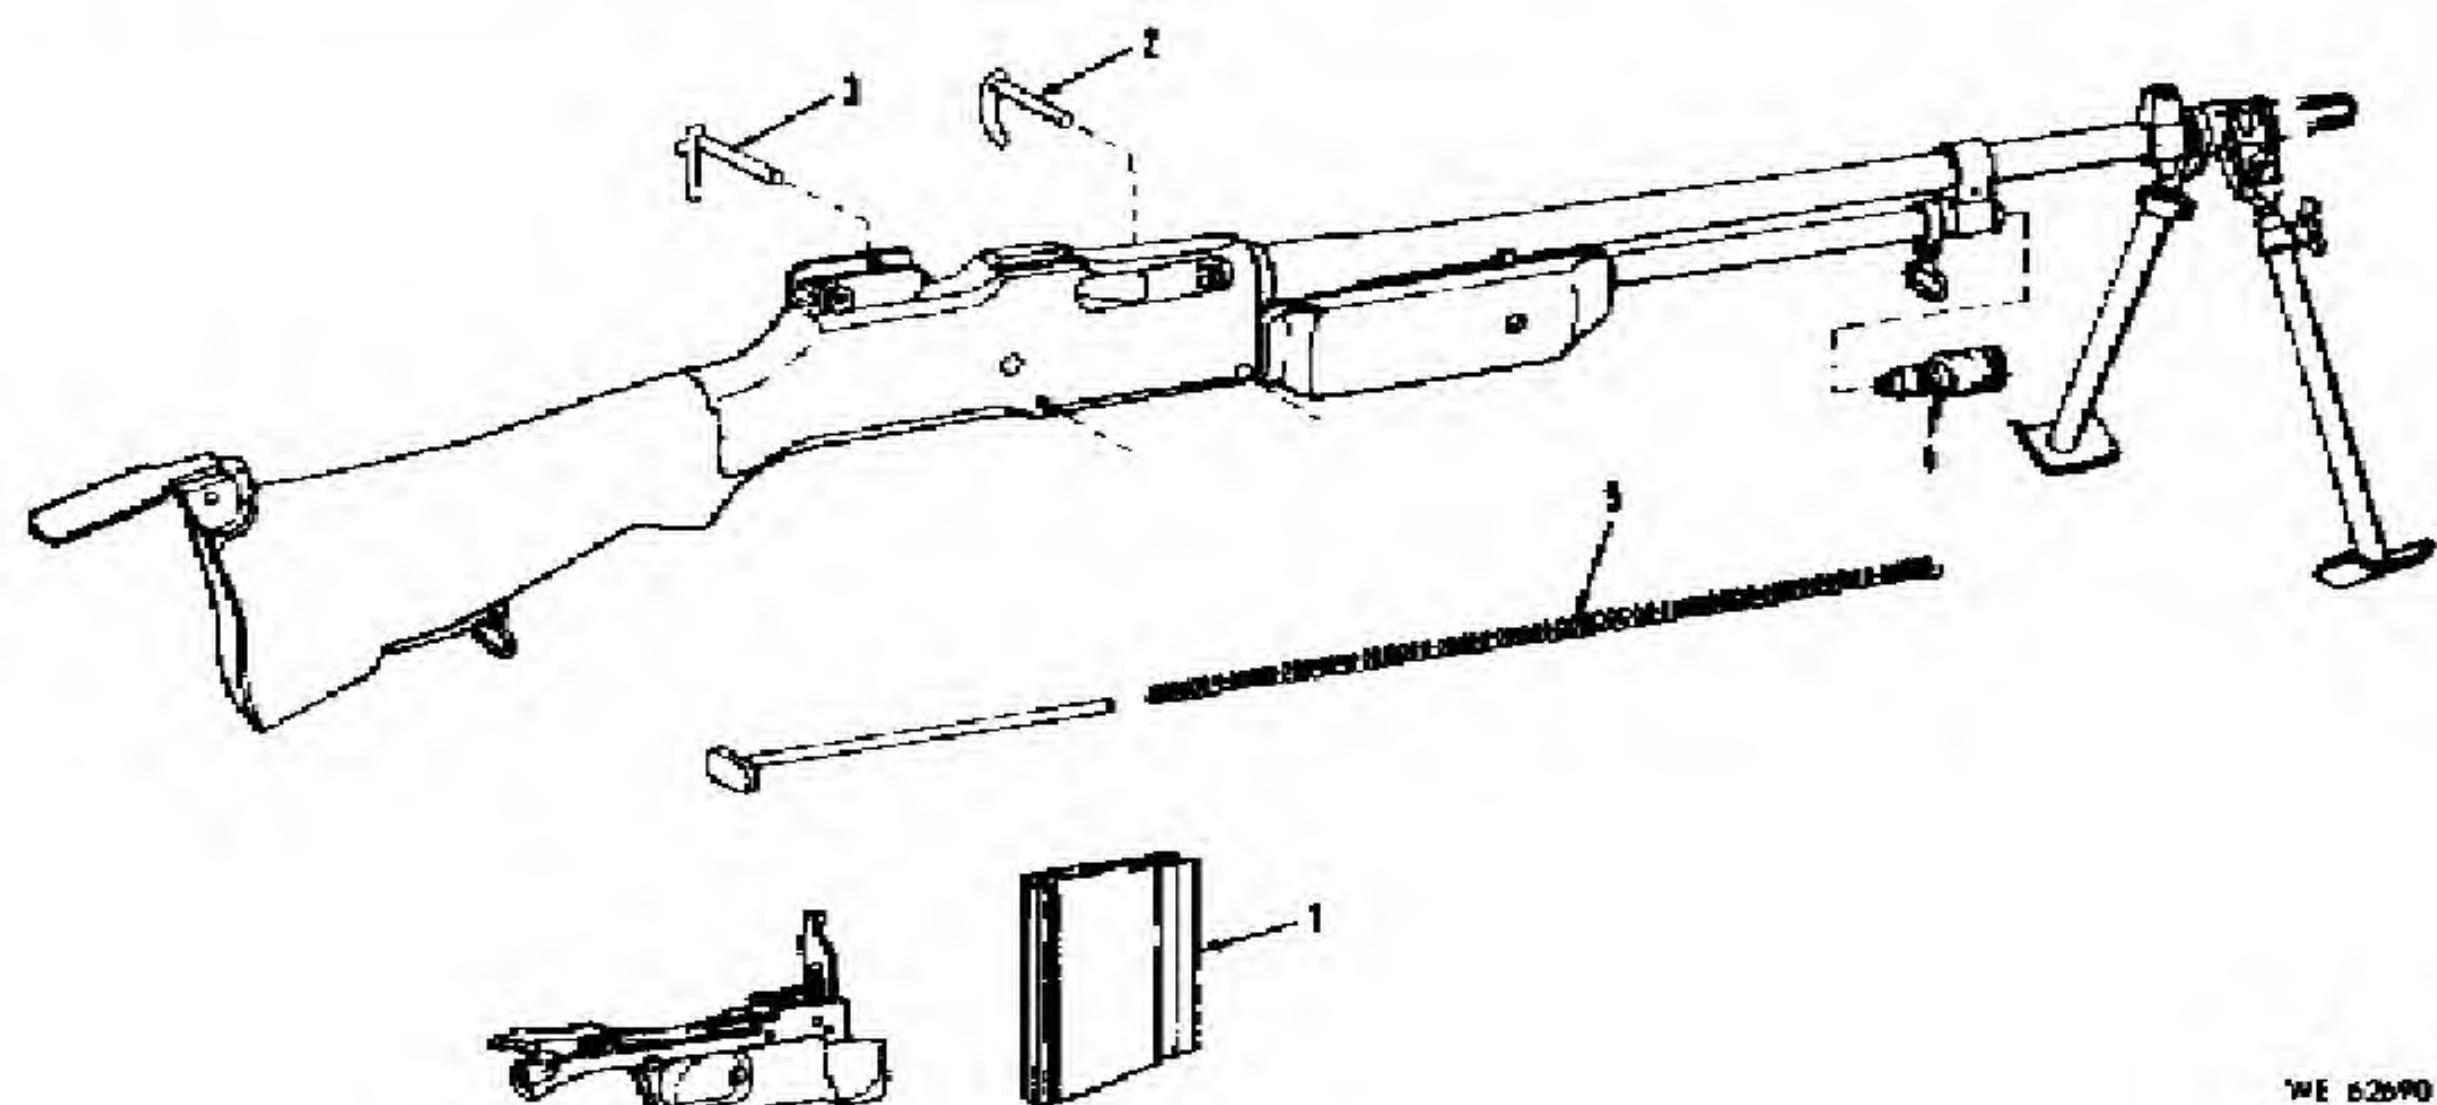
Components and assemblies—Caliber .30 Browning Automatic Rifle M1918A2—partial exploded view.
